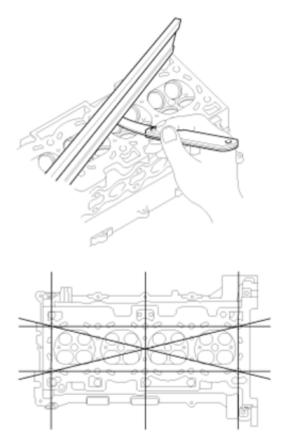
Measuring Surface Contacting Cylinder Block & Manifolds For Warpage Courtesy of KIA MOTORS AMERICA, INC.
